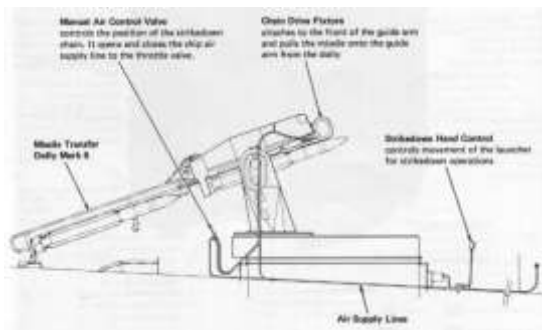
Strikedown Equipment with Mk 6 Dolly
